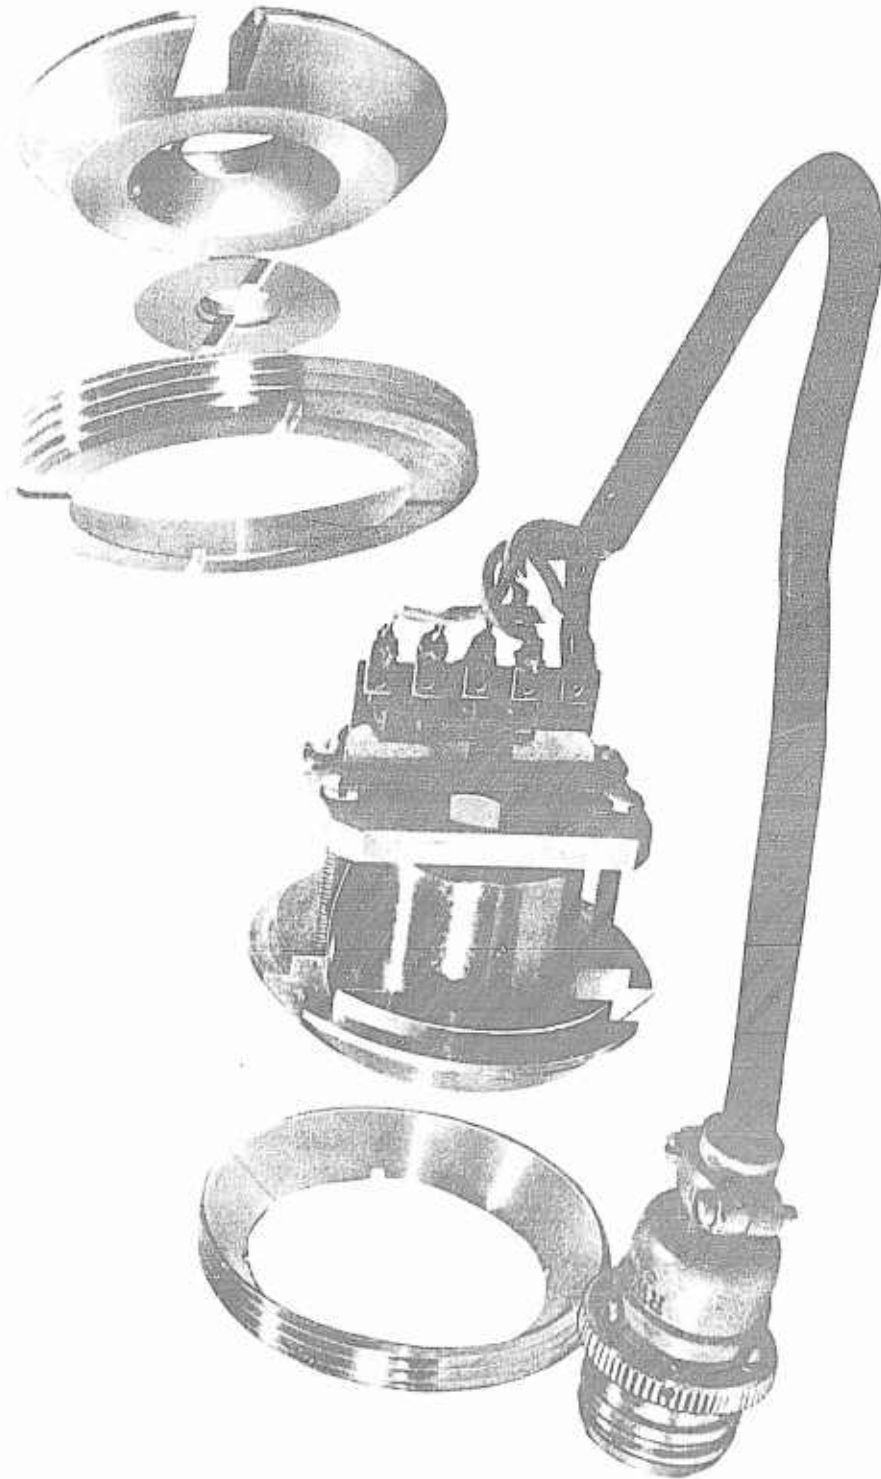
New Type Mount for the 20PAD-WS Gauge (Side View with Retaining Ring Removed). Inset shows front view of same mount (exploded).
